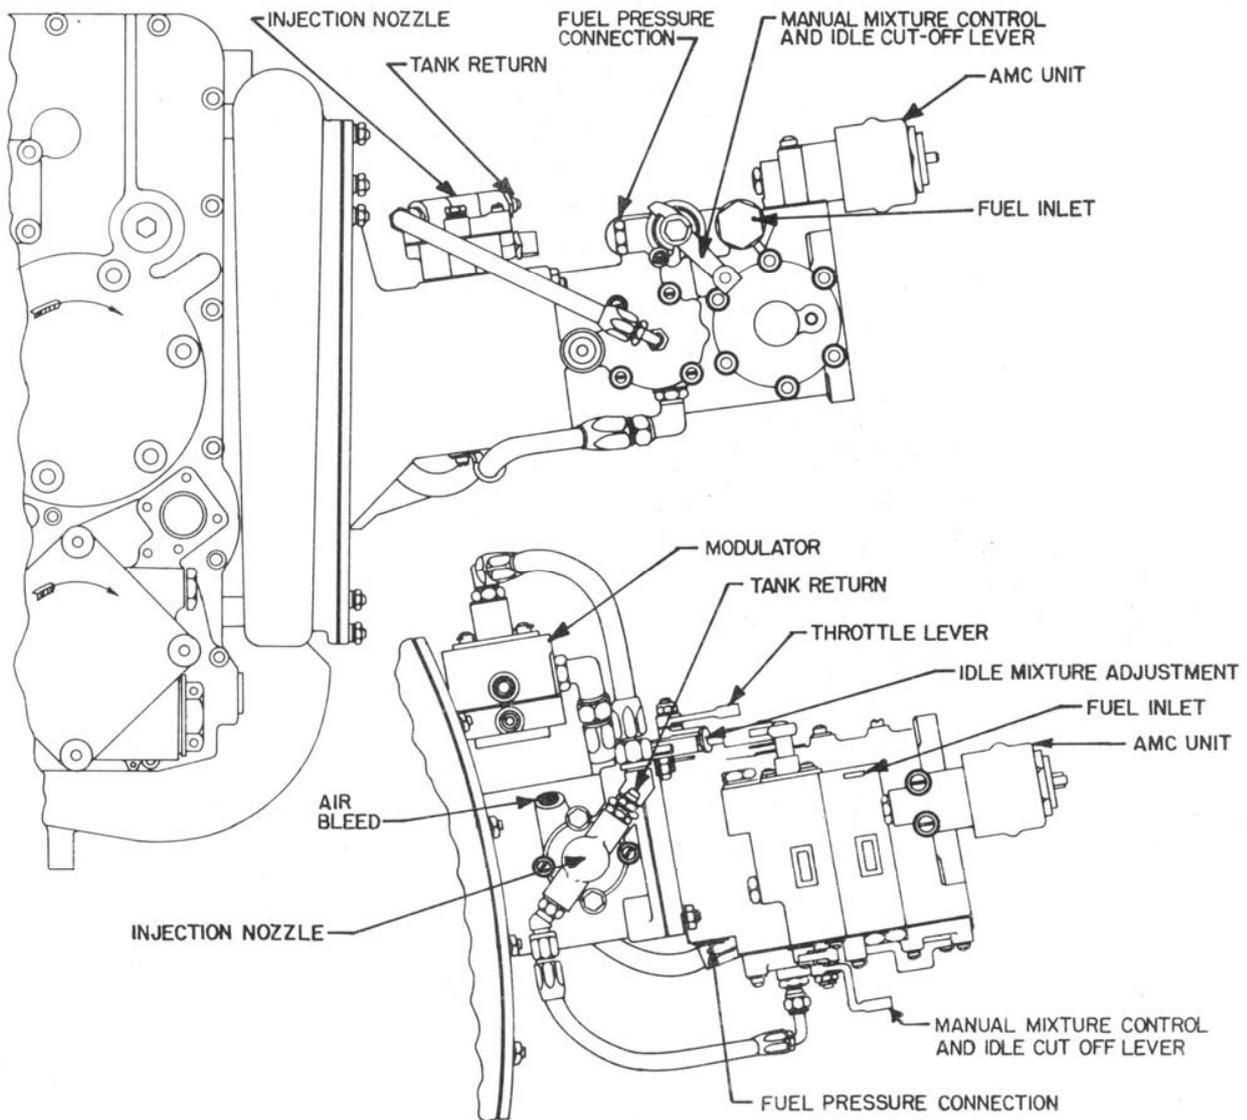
Installation Drawing – IGSO-540-A1C, -A1E Fuel Injector –
